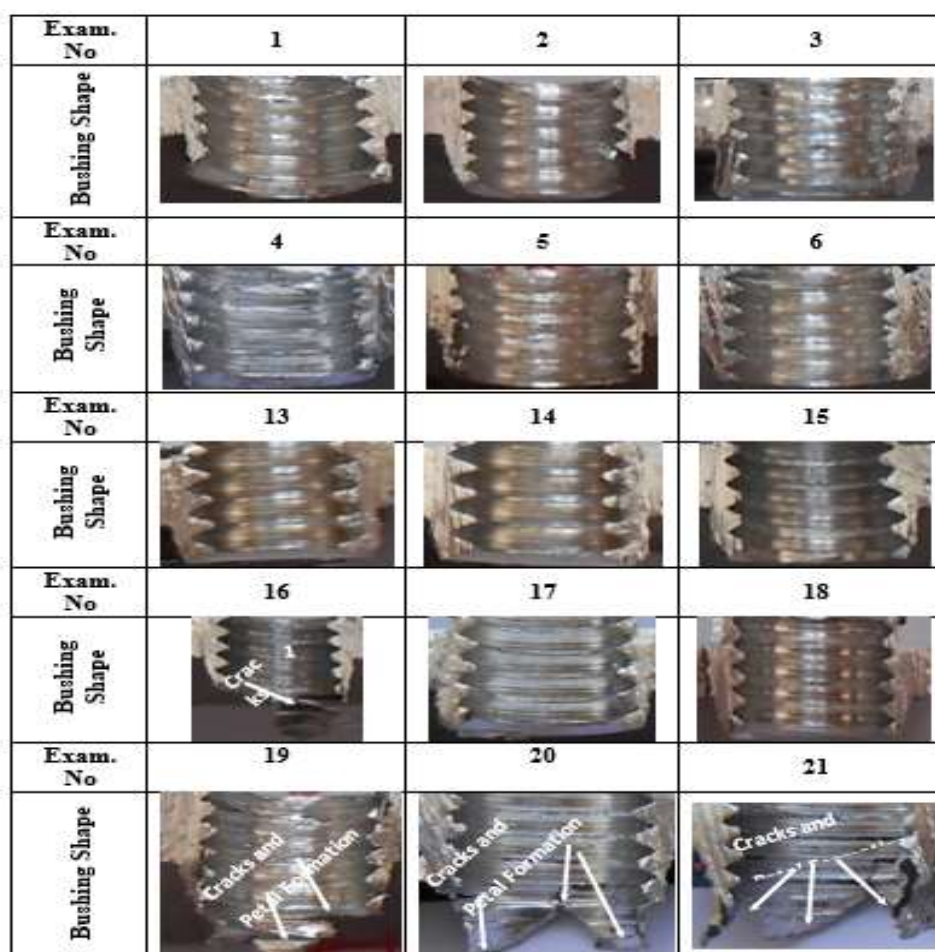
Threading of bushing shapes, achieved from thermal friction drilling with mould and without mould
